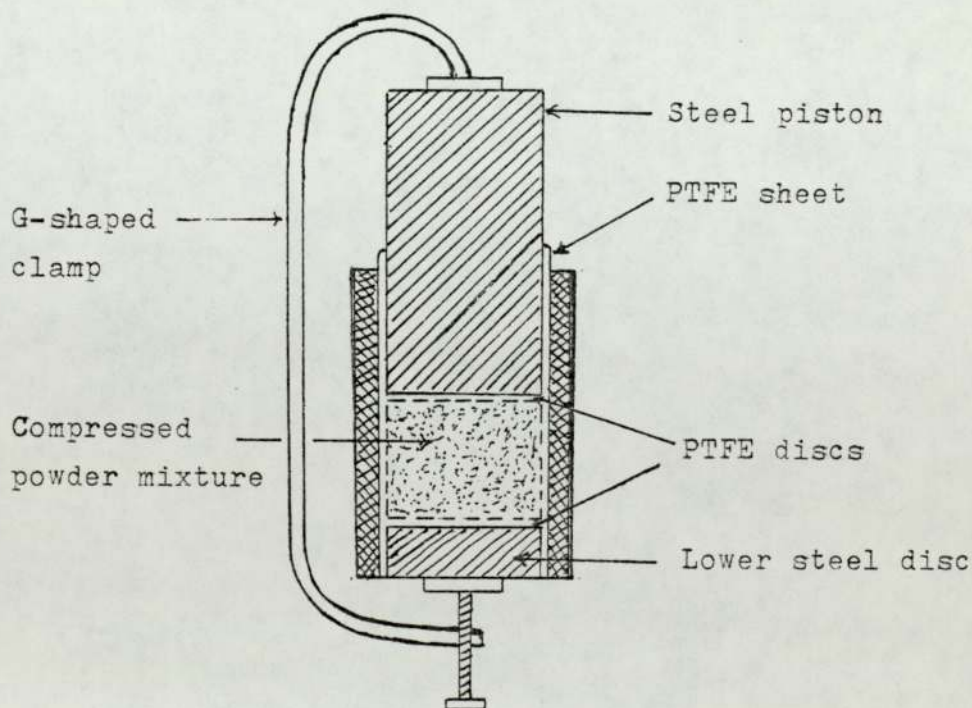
Clamping the compressed powder mixture during the heating process.
